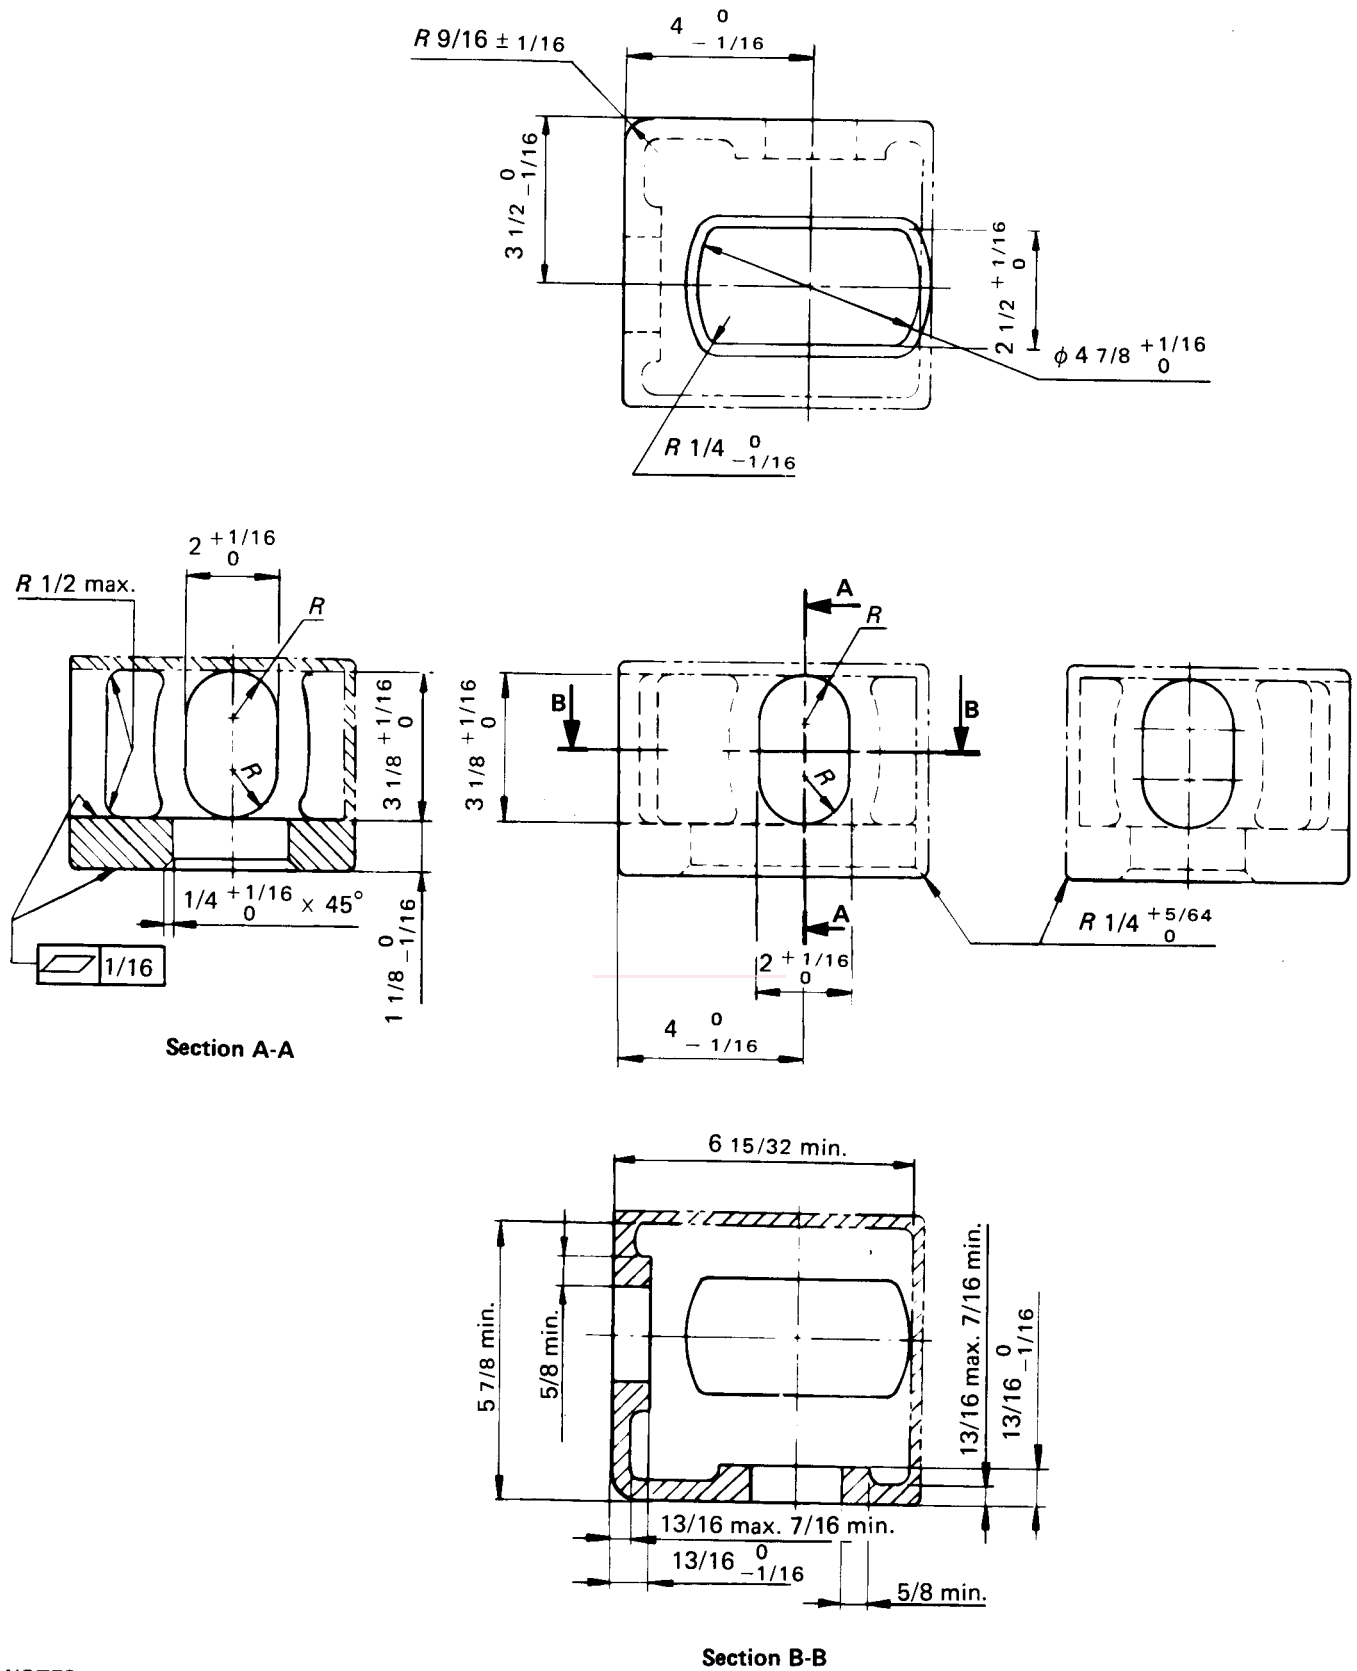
Top corner fitting — Dimensions in inches (see clause 3)
